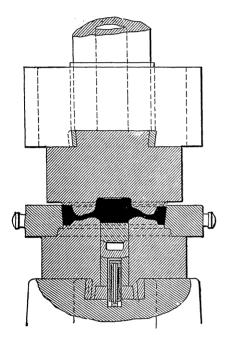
Vertical Section of Dies and Wheel Blank.
